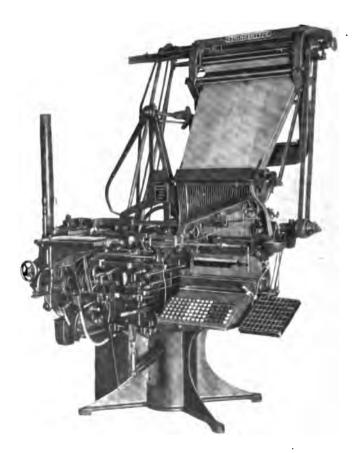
Stringertype matrix-composing and casting machine, 1913 model. To face page 417.] obtained, and the breakaway tang permits a hard metal to be used (similar to that of which ordinary type for hand-composition is made), while the metal used in the slug machines, and even in those similar to the Monotype, must necessarily be softer.
